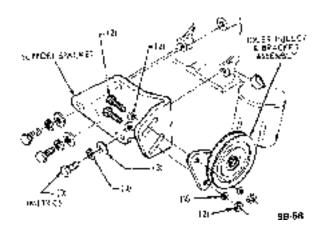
B-81 Idler Pulley and Bracket Assembly and Support Bracket GT
